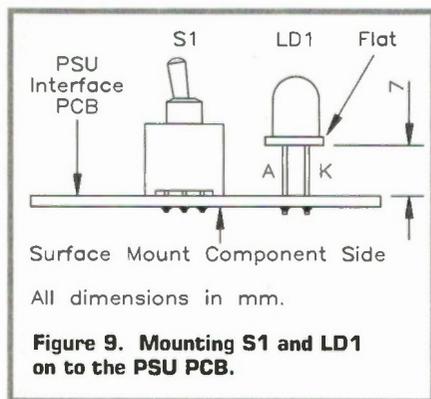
Mounting S1 and LD1 on to the PSU PCB.
